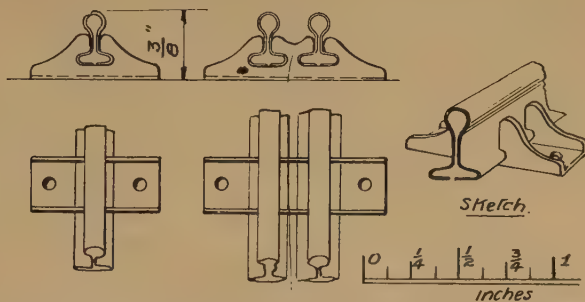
“Lowko” Track, Small Section, shown Full-size
